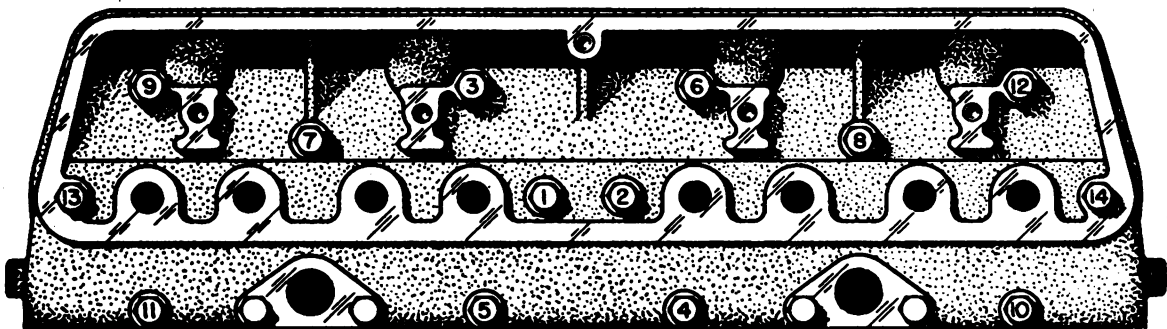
Cylinder Head Stud Nut Tightening Sequence
